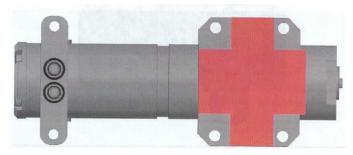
Underside of the Pump with O-rings and Thermal Pad
